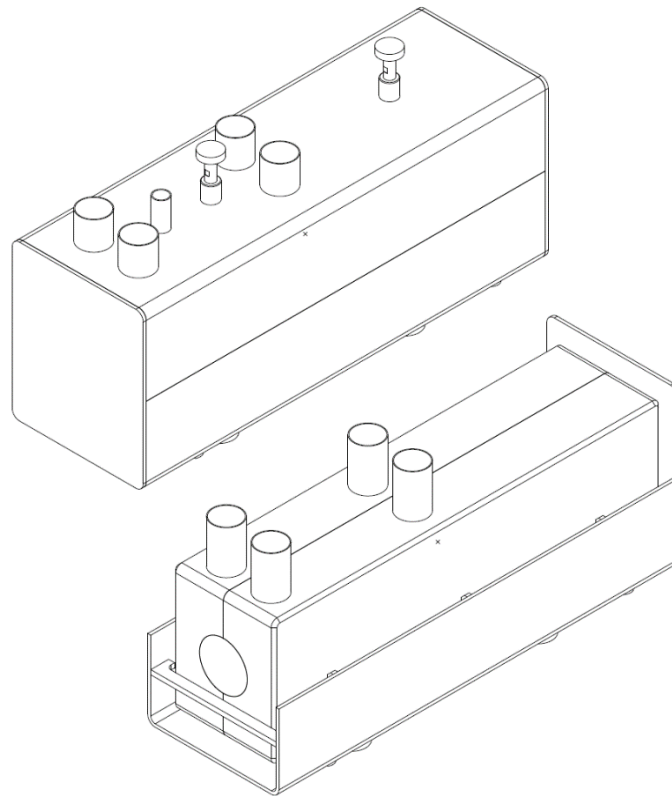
Isometric view of the SHiP target assembly. The top figure shows the target external containment with handling fittings and the water and helium gas fittings, while the bottom one shows a cut-view of the assembly, with a view on the inner pressurized shroud.
